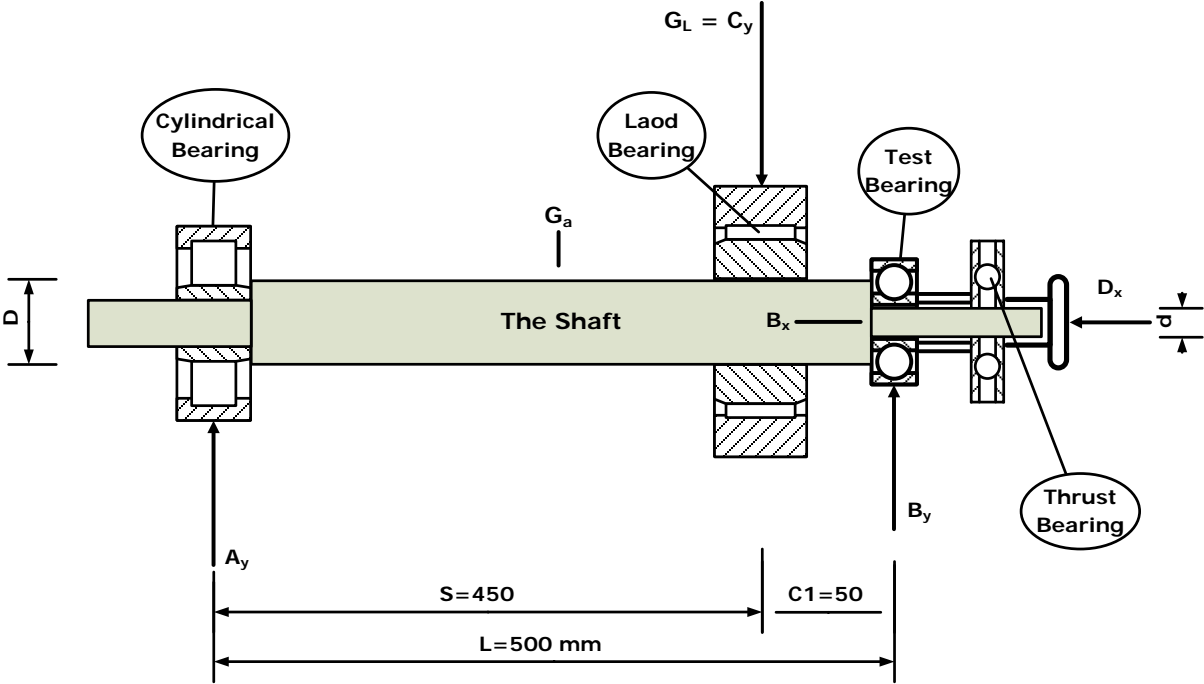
simplified setup of the shaft and the bearings where $D = 35\text{mm}$ and $d = 20\text{mm}$.
